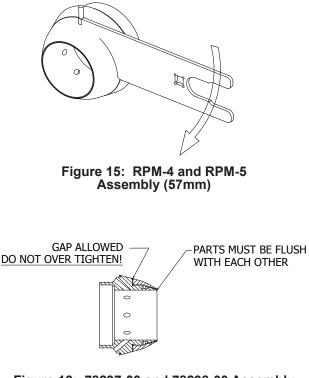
78297-00 and 78298-00 Assembly (57mm)
